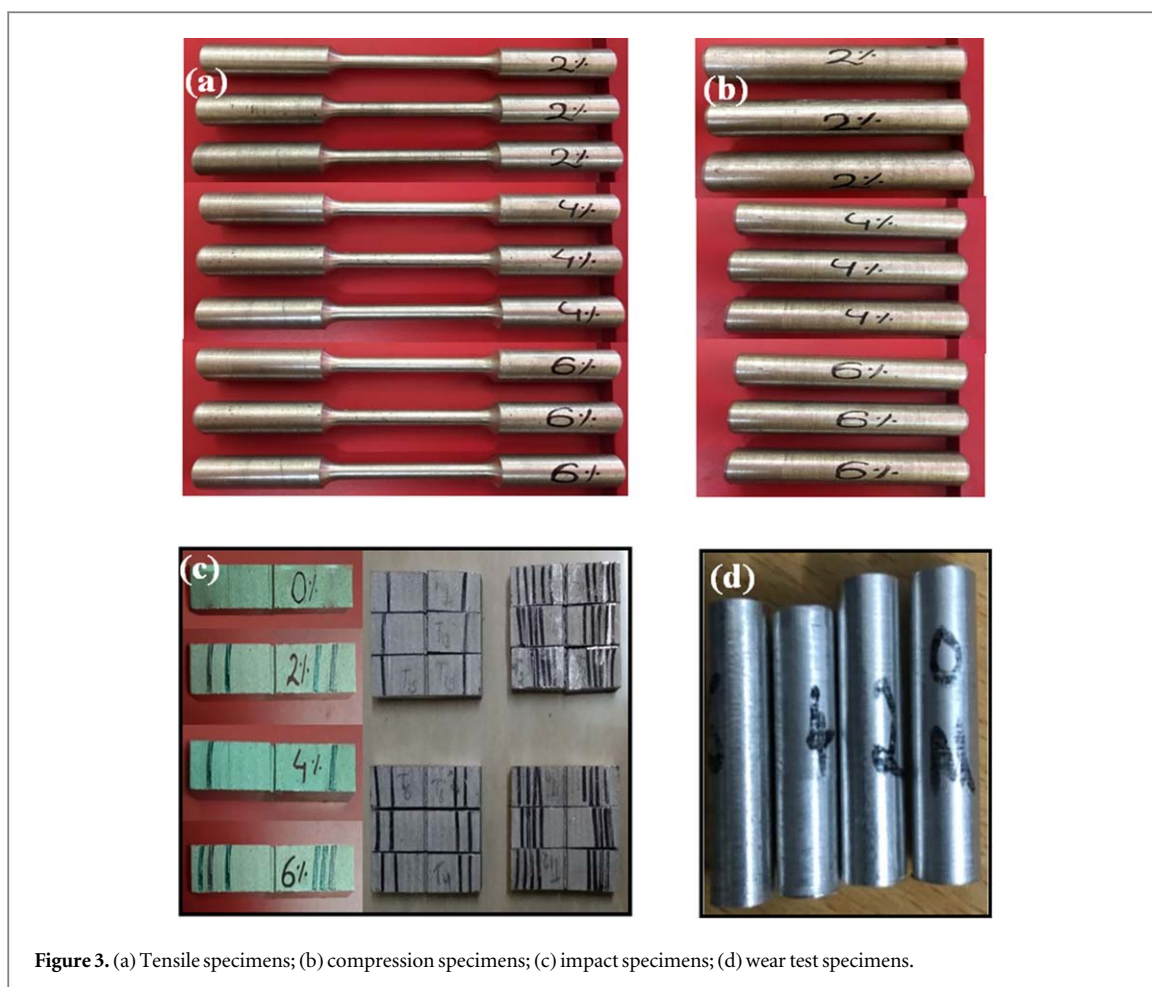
(a) Tensile specimens; (b) compression specimens; (c) impact specimens; (d) wear test specimens.
